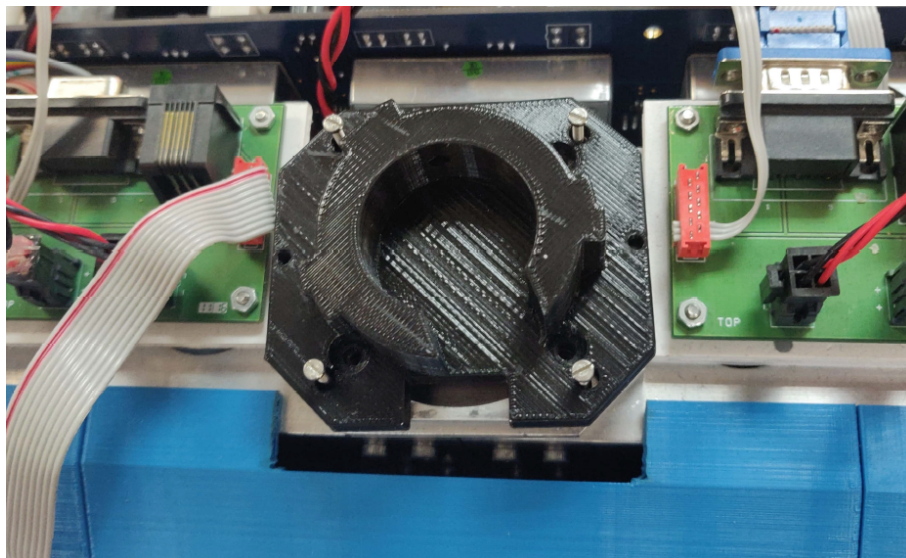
Mechanical piece to attach the soft robotic neck to the robot's chest.
